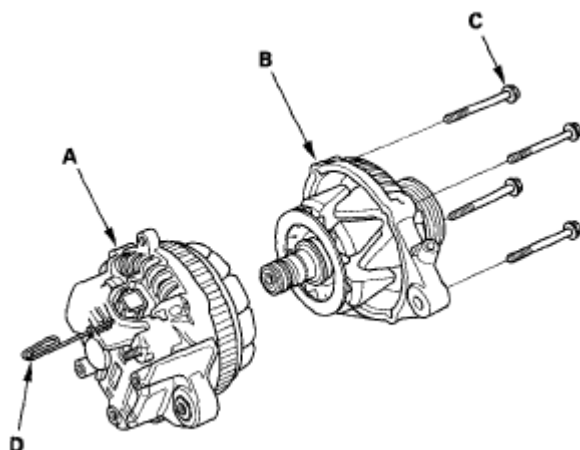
Identifying Heat Rear Bearing Seat With Heat Gun
